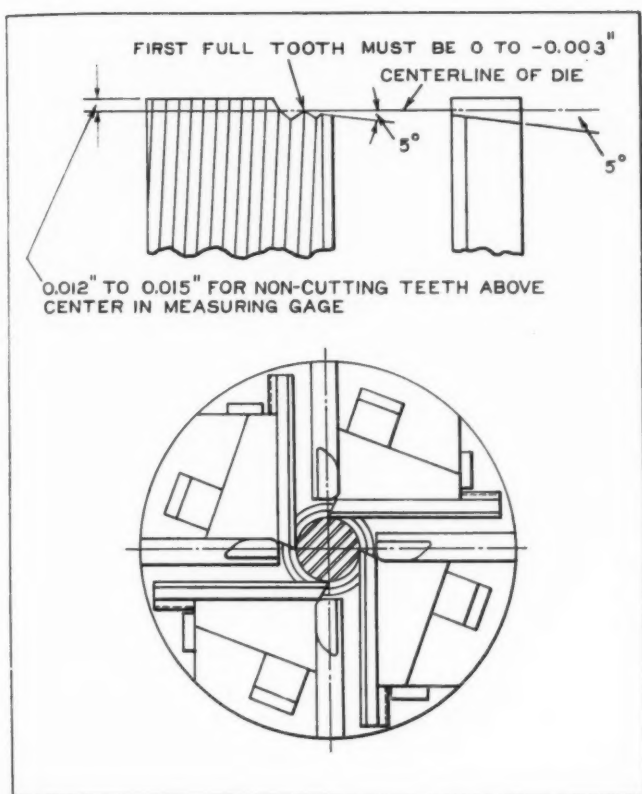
Die-head with Tangent Chasers Set for Threading Zinc-alloy Die-castings
